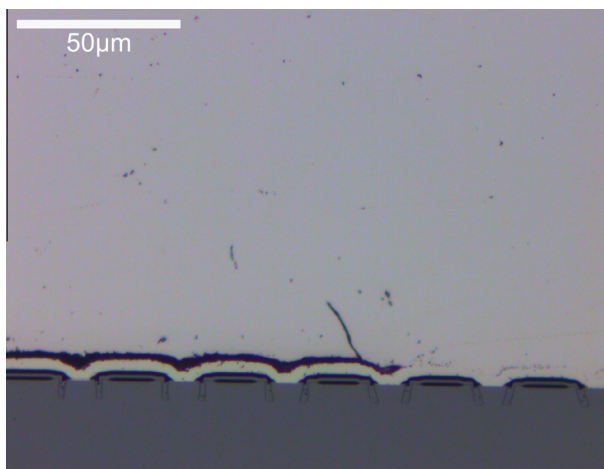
Cross-sectional image of the heel of a wire bond in a failed module.
